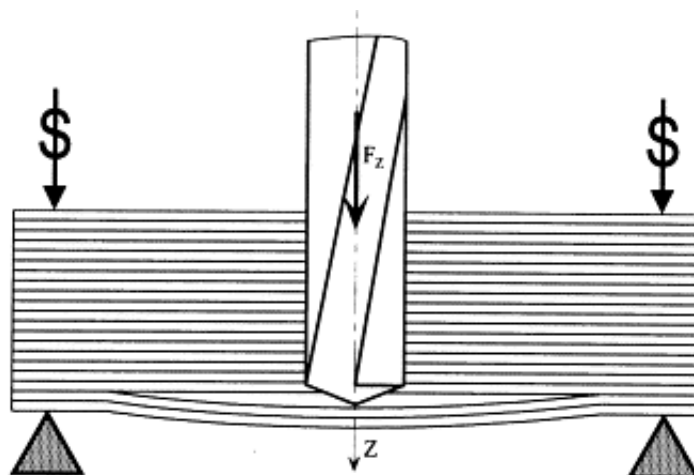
Exit defect in a hole drilled without backing plate [48].
